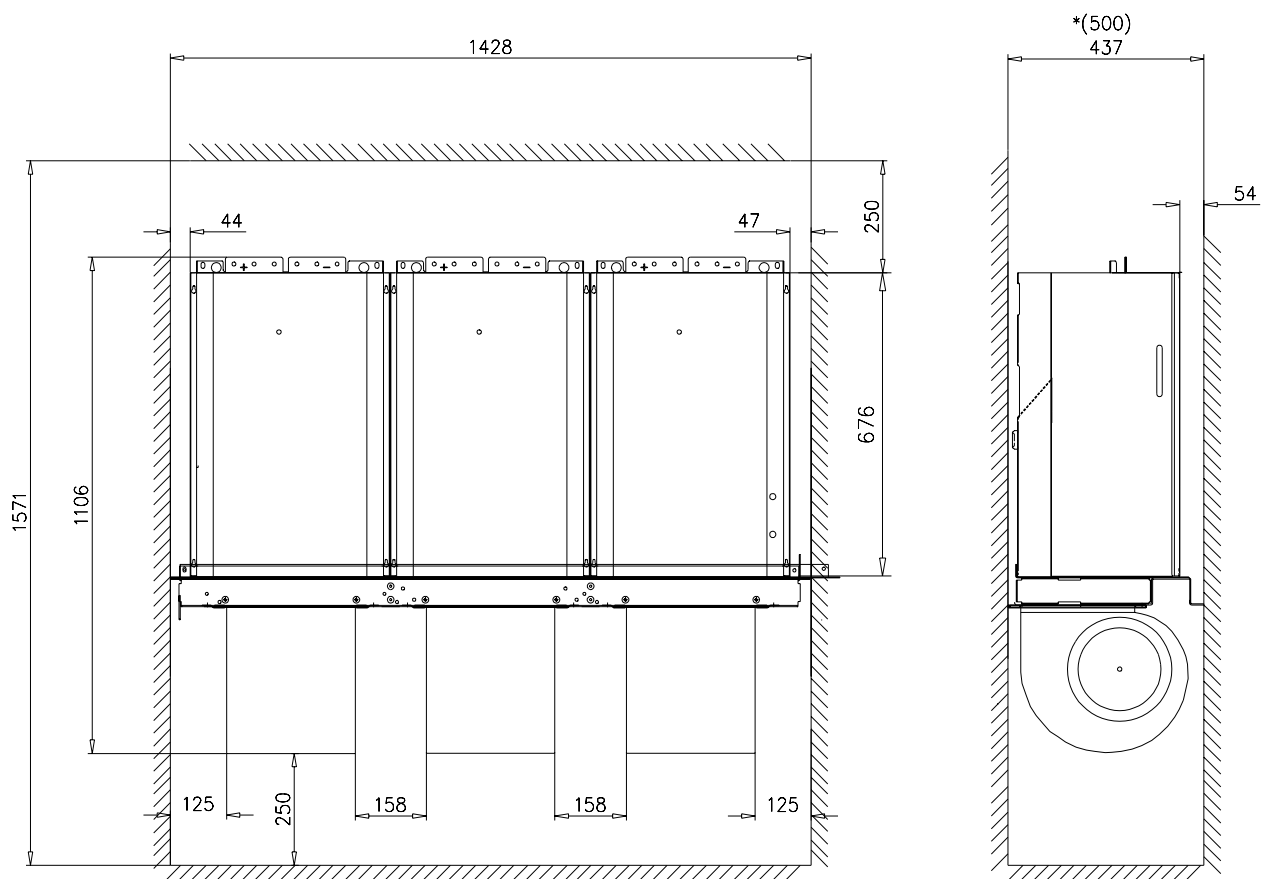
Module mounting plate for Frame R10i/R11i modules.
